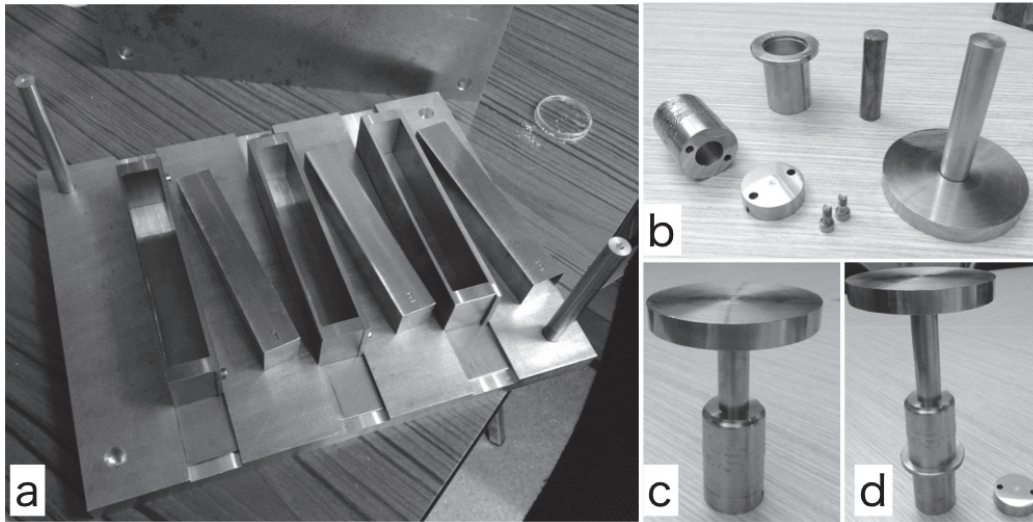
Stainless steel molds. (a) Three rectangular molds for flexure test covered by solid rectangular parts during the setting process. An upper lid is fixed on top to have a surface where to apply an external stress. (b-d) Cylindrical mold during the sample loading (c) and unloading (d). For both phases a pressure is applied on the top of the large cylinder.
